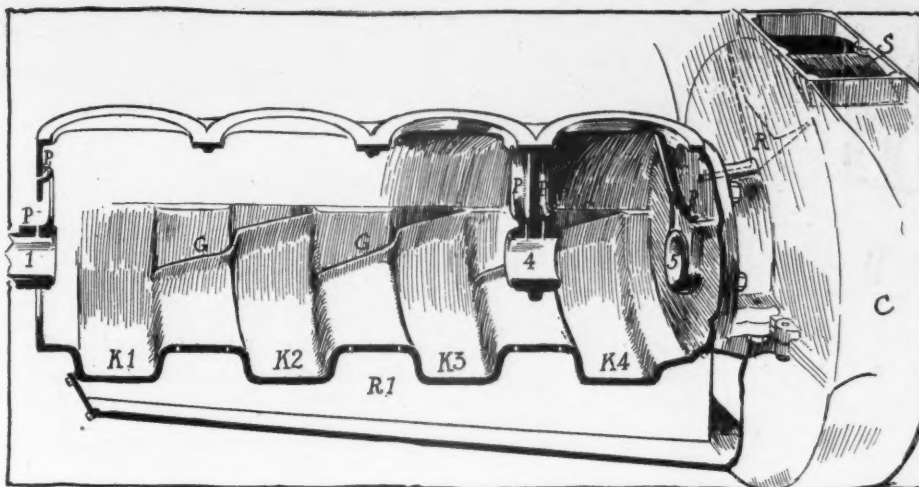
FLYWHEEL CIRCULATING OIL SYSTEM ON JACKSON CARS
